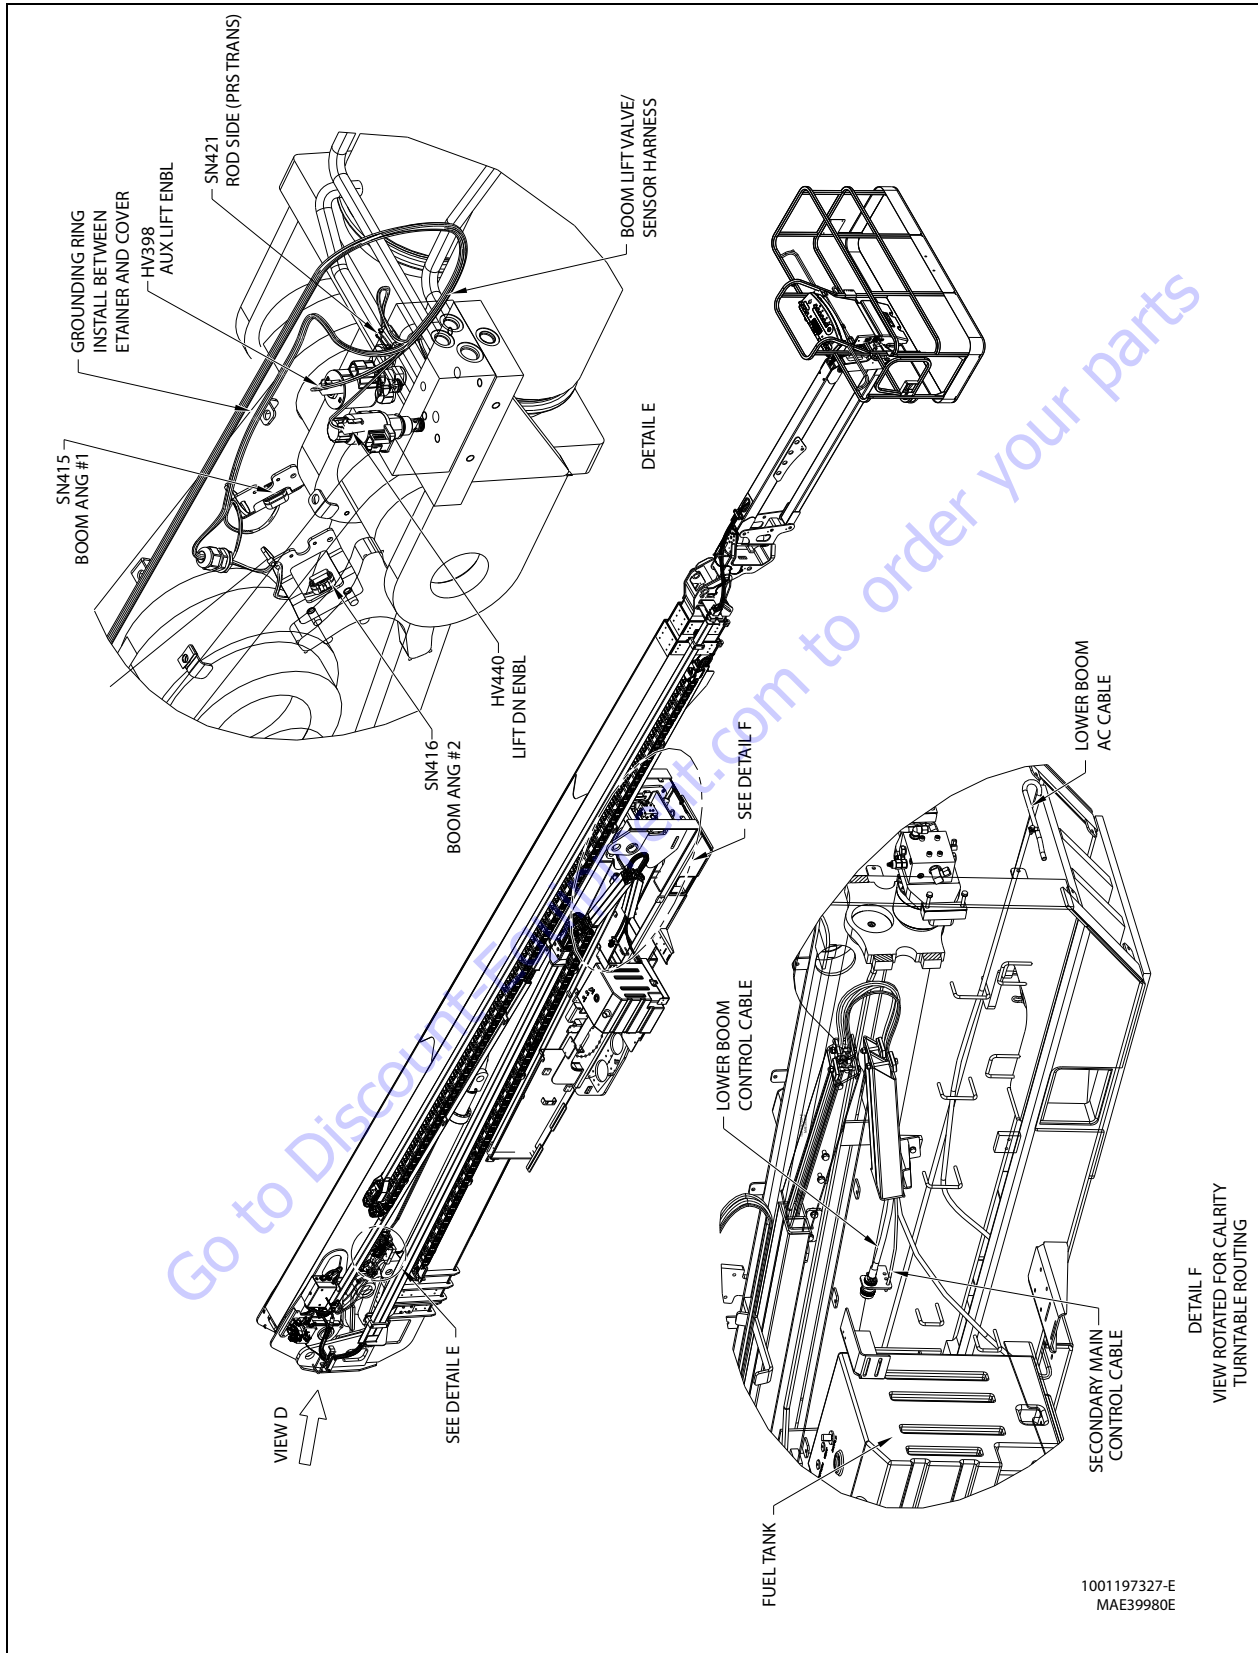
Boom Electrical Installation (CE) - Sheet 2 of 5
